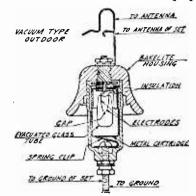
A sectional view of a vacuum type of lightning arrester.
